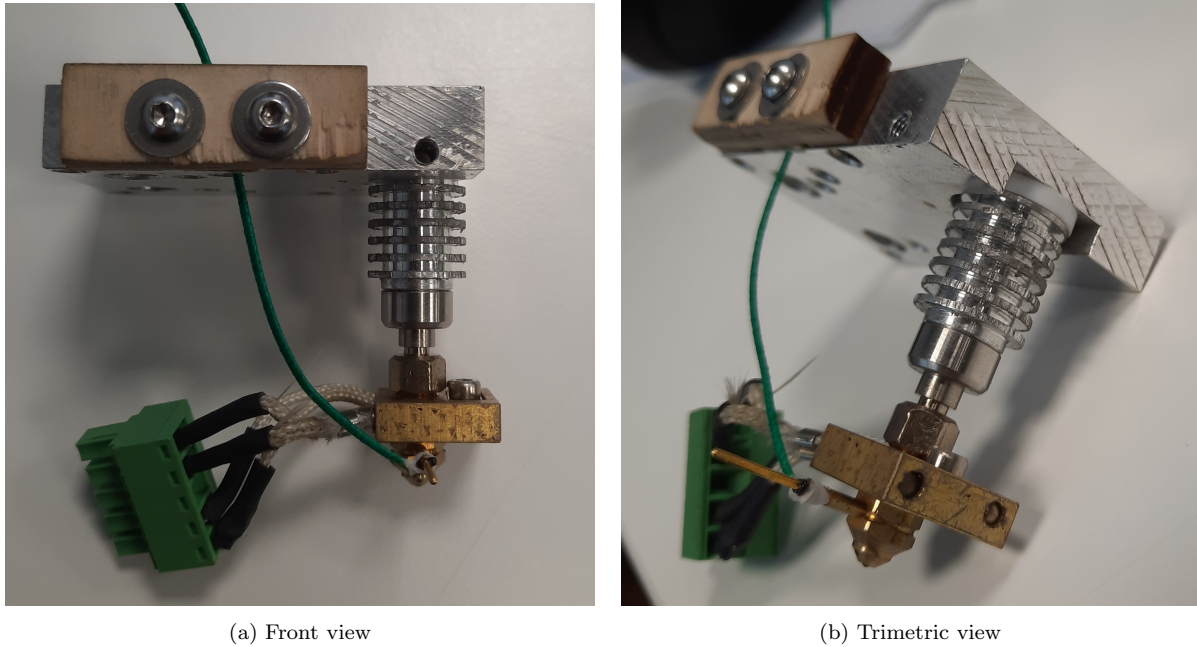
A thermocouple is glued to the guidance tube. Its wire is clamped to the aluminum bracket.
